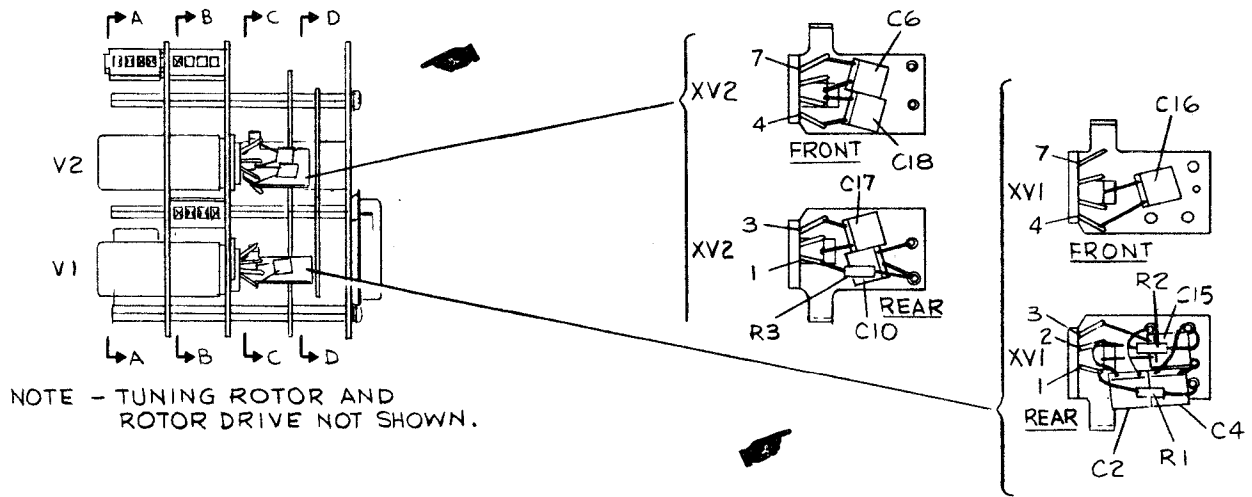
Top Coupling Assembly (P/O A2A4)
